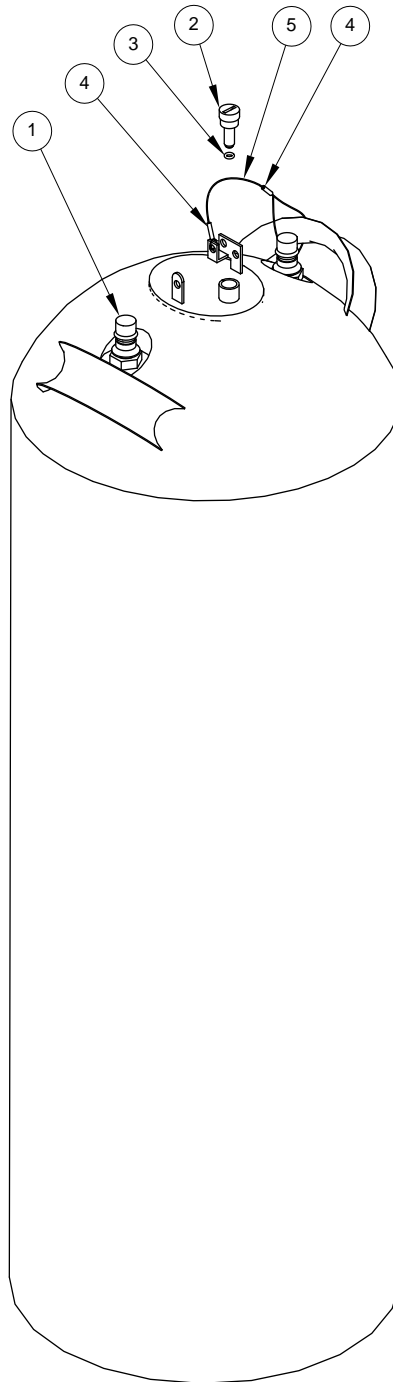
15 Gallon Chemical Jug Assembly
